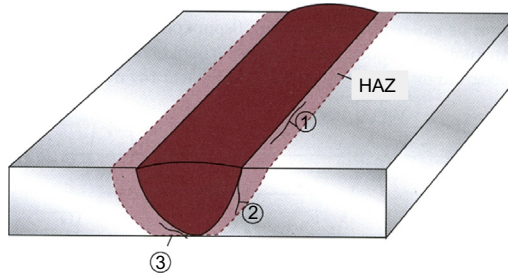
Weld metal cracks in heat affected zone (HAZ) due to hydrogen-induced cracking: (1) underbead cracking, (2) toe cracking, (3) root cracking.
